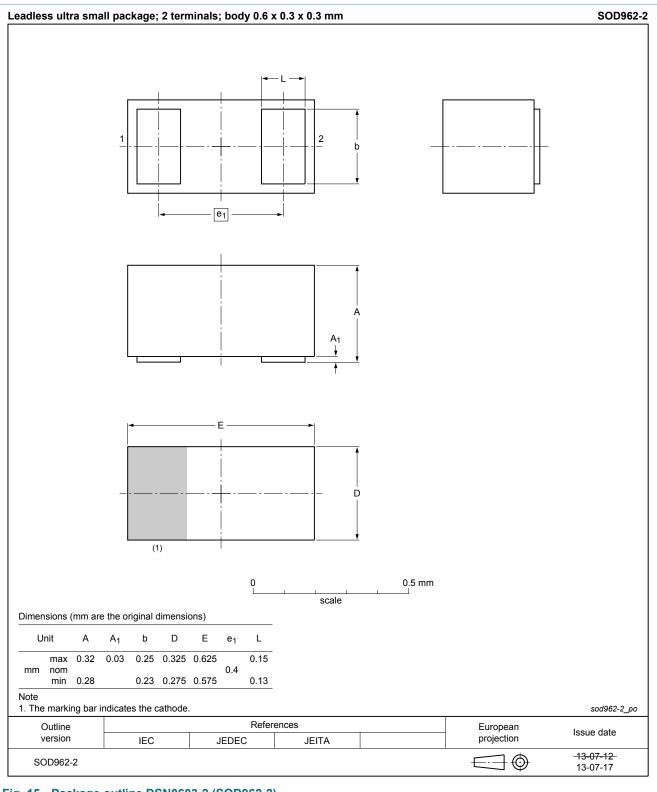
Package outline DSN0603-2 (SOD962-2)
